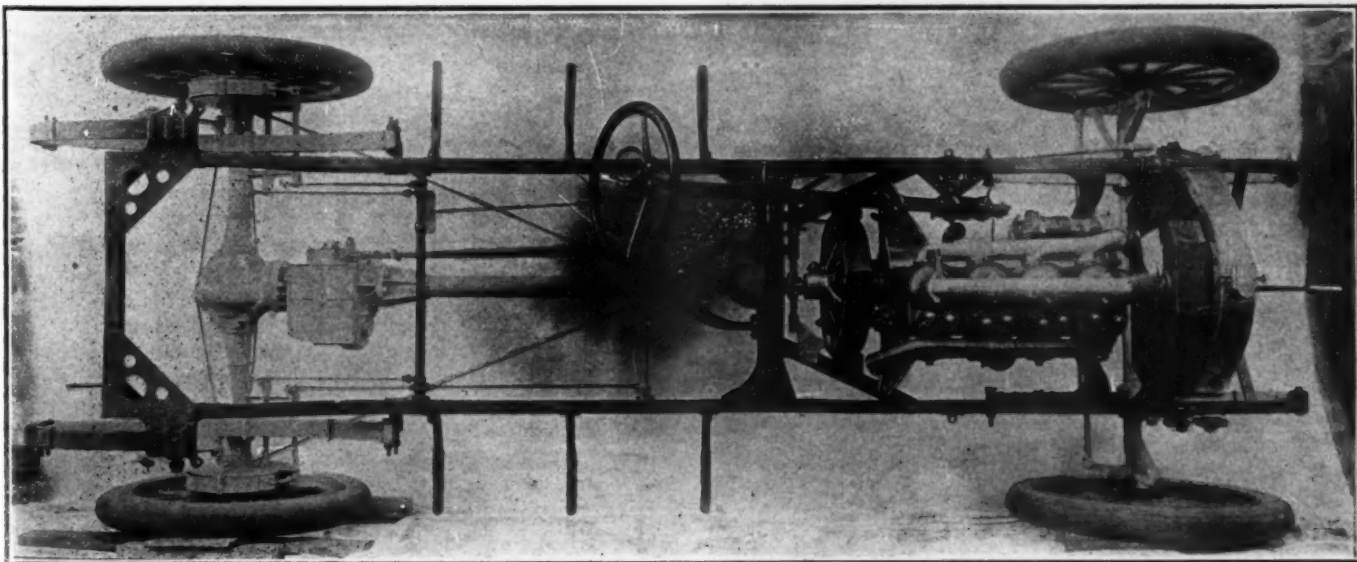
Plan of the chassis of Models 52, 53 and 54, including 35 H. P. motor, cone clutch, universal joint and unit type of live rear axle holding a three-speed selective sliding gear
